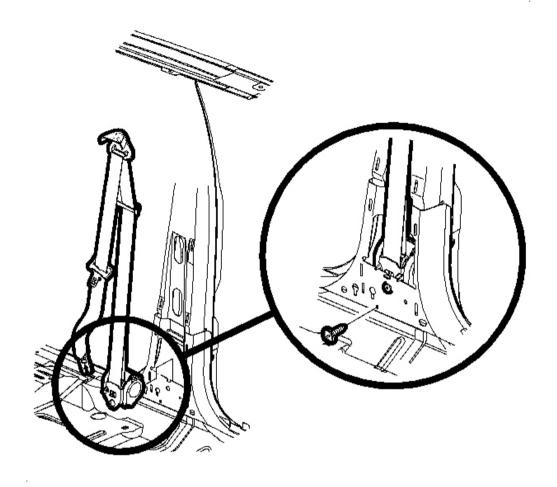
Retractor Fastener Courtesy of GENERAL MOTORS CORP.
